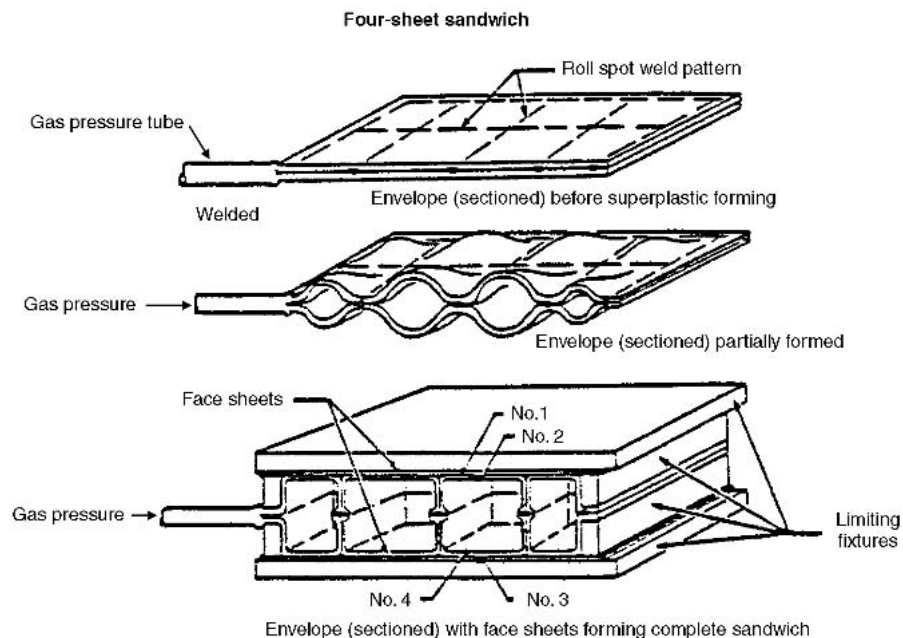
The Rockwell SPF/DB expansion method for fabricating four sheet SPF/DB truss and I-beam stiffened core
